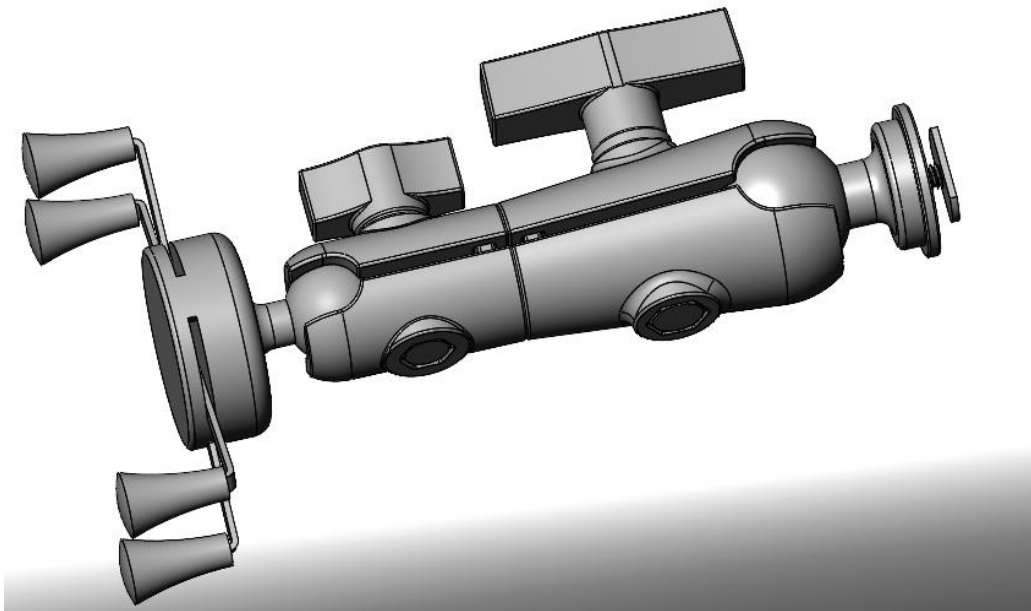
Sample of ball-grip positioning arm for hand-held devices.
